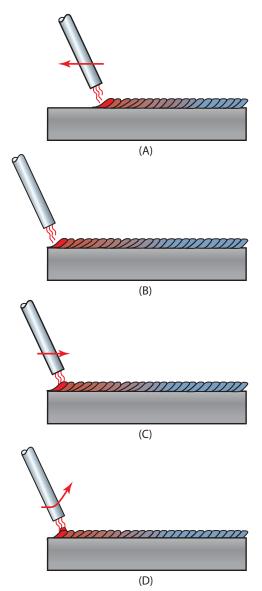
(A) Make a uniform weld. (B) Weld to the end of the plate. (C) Hold the arc for a second at the end of the weld. (D) Quickly (so you deposit as little weld metal as possible) move the arc back up onto the weld and break the arc.
